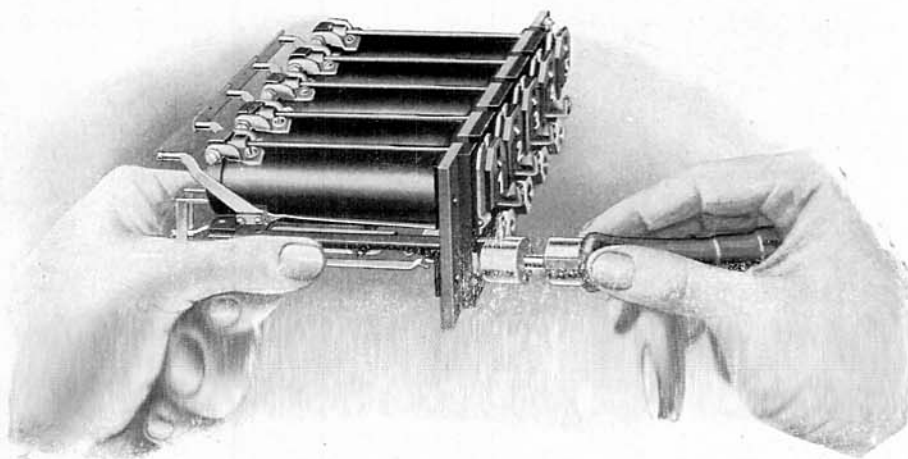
Illustrating how any jack can be removed from mounting strip without disturbing other lines
